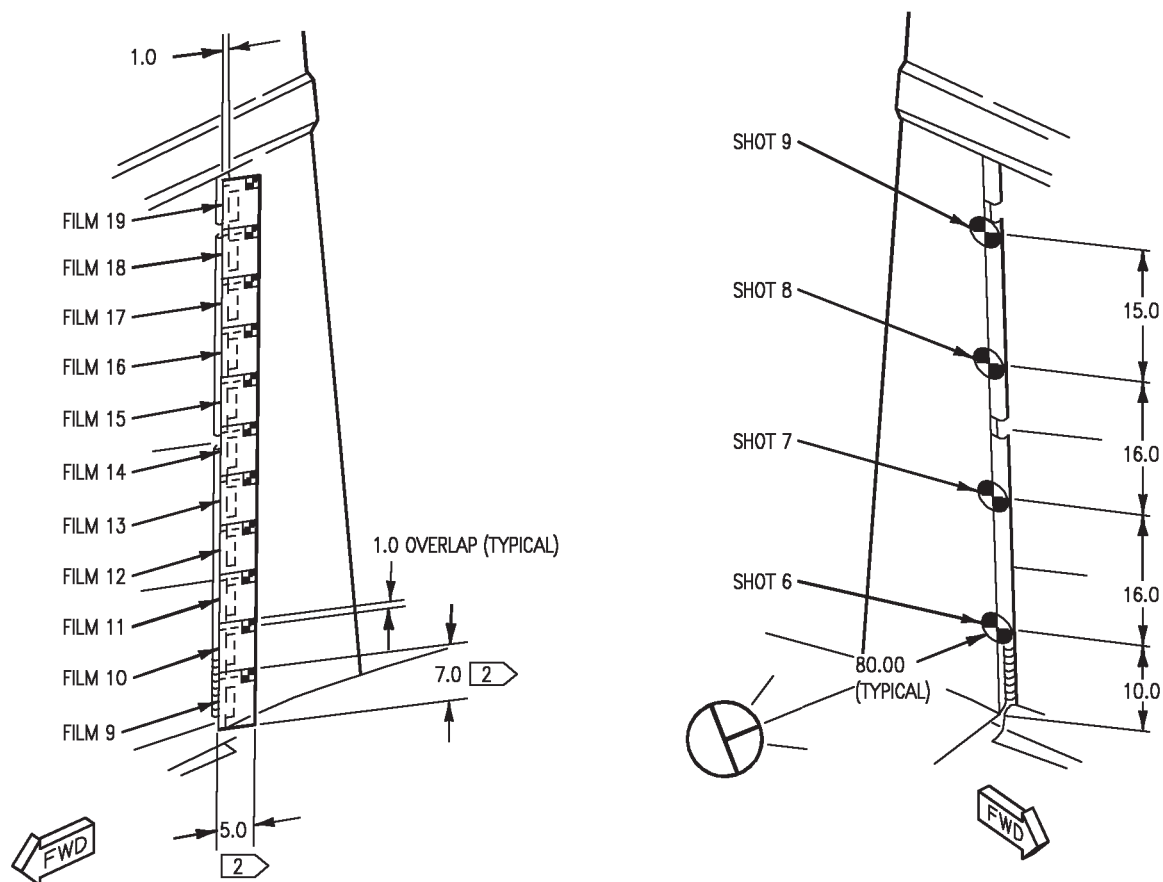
Rudder, Water in Honeycomb (Sheet 1)
